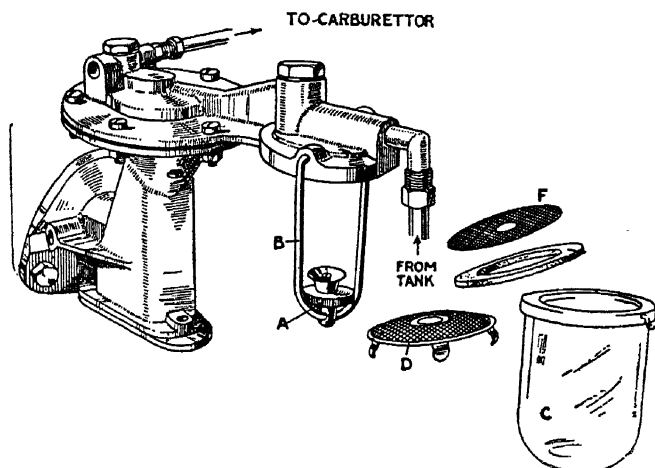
The Combined Petrol Pump and Filter used on Armstrong-Siddeley Engines.
